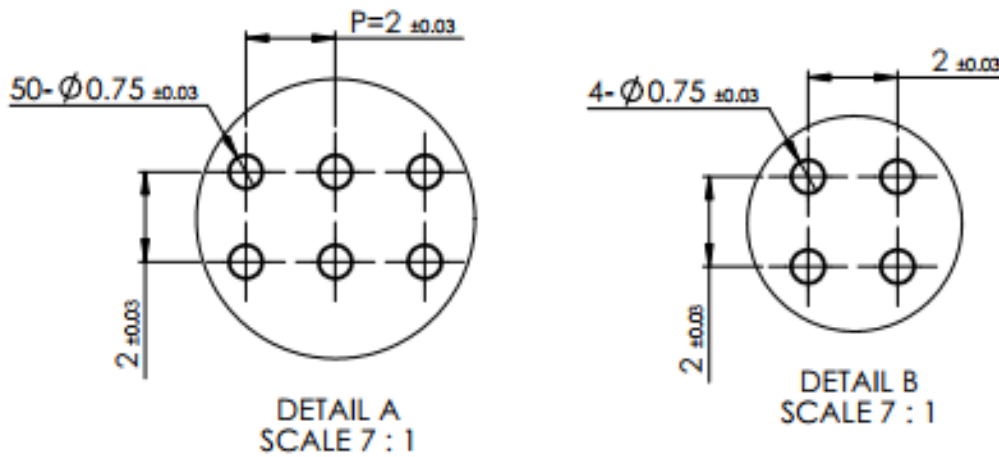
OBC/EPS Board 50pin connector Detailed 2D Drawing
